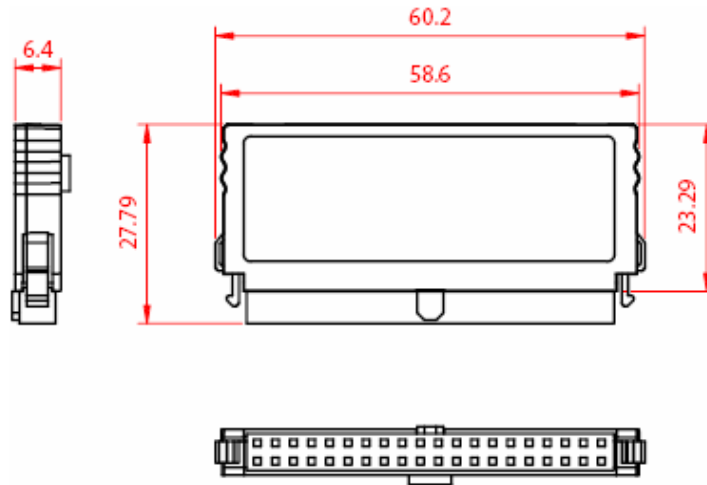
Mechanical Dimension of EDC4000 40-pin(Horizontal Female Type A)
